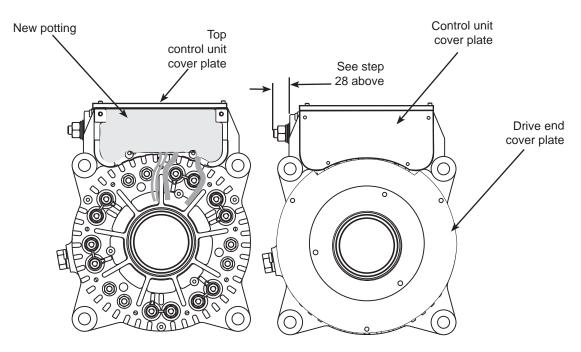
Replacing Control Unit Assembly and/or B+ Terminal on N1388 Alternator
